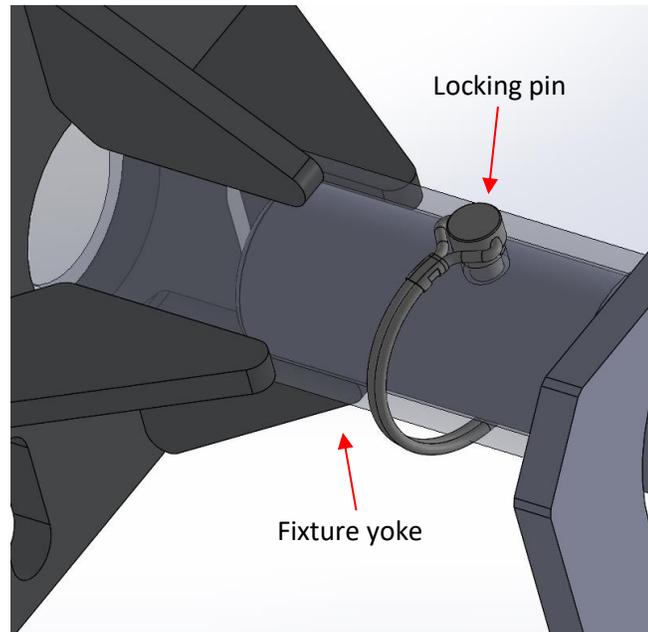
Welding Fixture Yoke Connects to Shaft with a Locking pin
